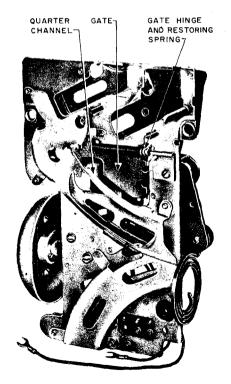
Coin First Gong Signal and Chute Assembly, Rear View
